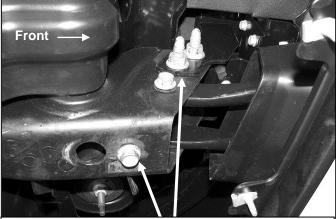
B) Remove the tow hook and hardware, (Driver/left tow hook pictured from below bumper)
